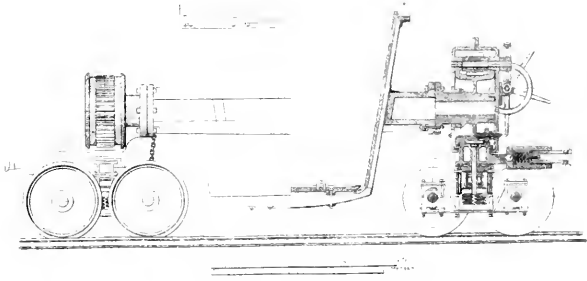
200 CU. FT. CINDER LADLE CAR.
